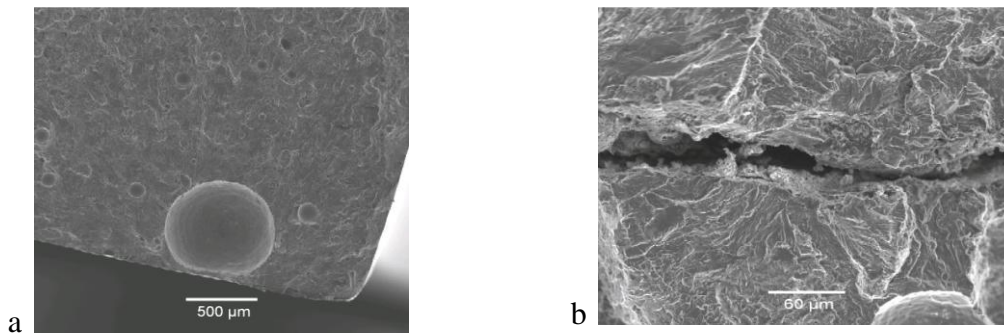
Cracks initiations and propagation in the 5083/5356 MIG welds
